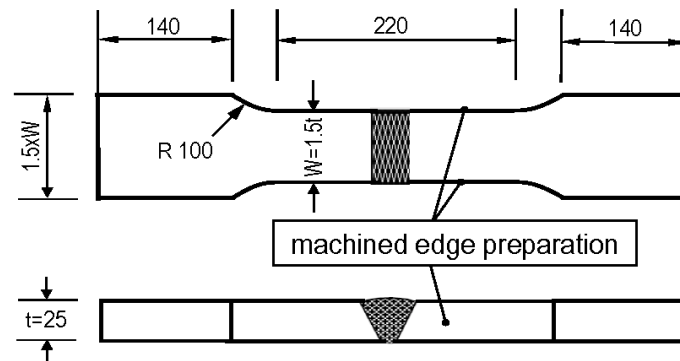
Butt weld specimens ($t = 25\text{mm}$)
